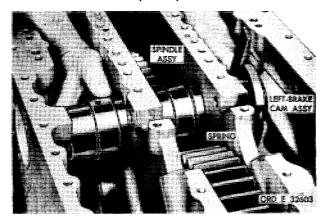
Removing spindle assembly, left-brake cam assembly and spring
